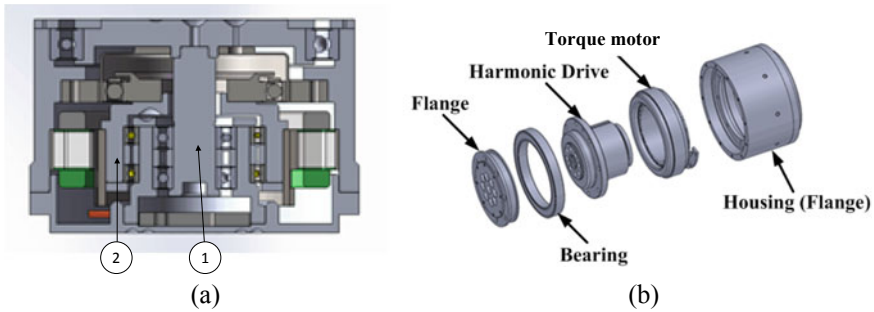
Overall structure of elbow joint driving unit, a assembly, where: 1—inner shaft and 2—outer shaft, b an exploded view
